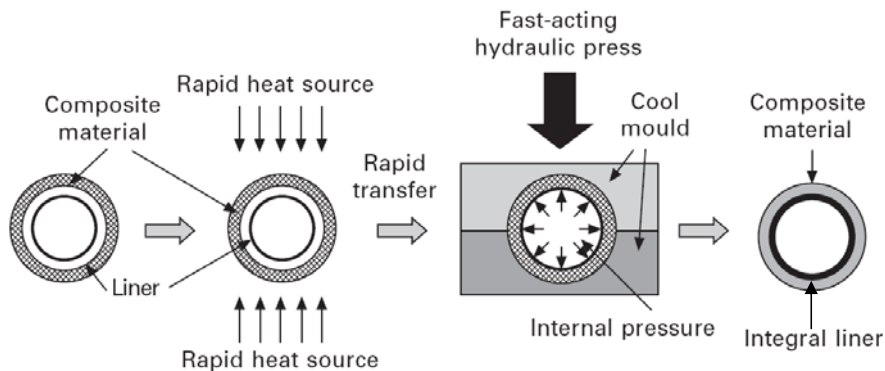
Non-isothermal bladder forming. In this example, the bladder is not removed and is kept as an integral liner in the final product [4].
